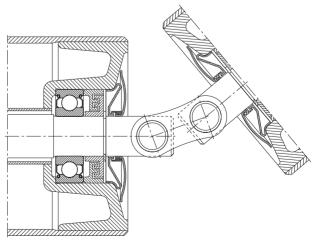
shows idler garlands connected by chain links. These idlers are part of a conveying installation for rock phosphate. The bearings fitted are deep groove ball bearings FAG 6303.2ZR.C3.
